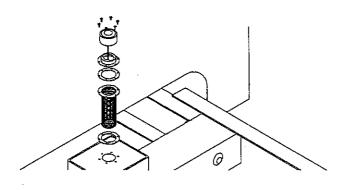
HYDRAULIC TANK FILLER/STRAINER INSTALLATION
